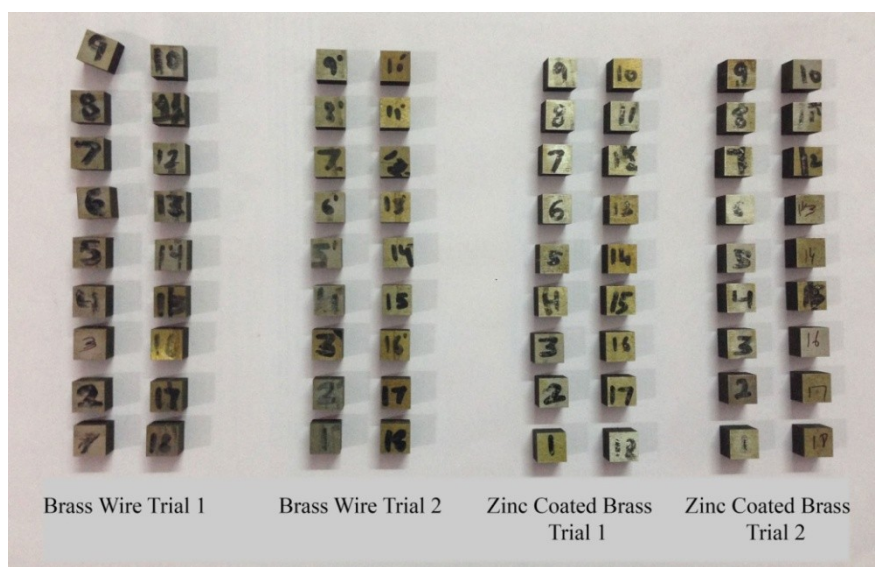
Machined Specimen (72) size 10mm*10mm*10mm
